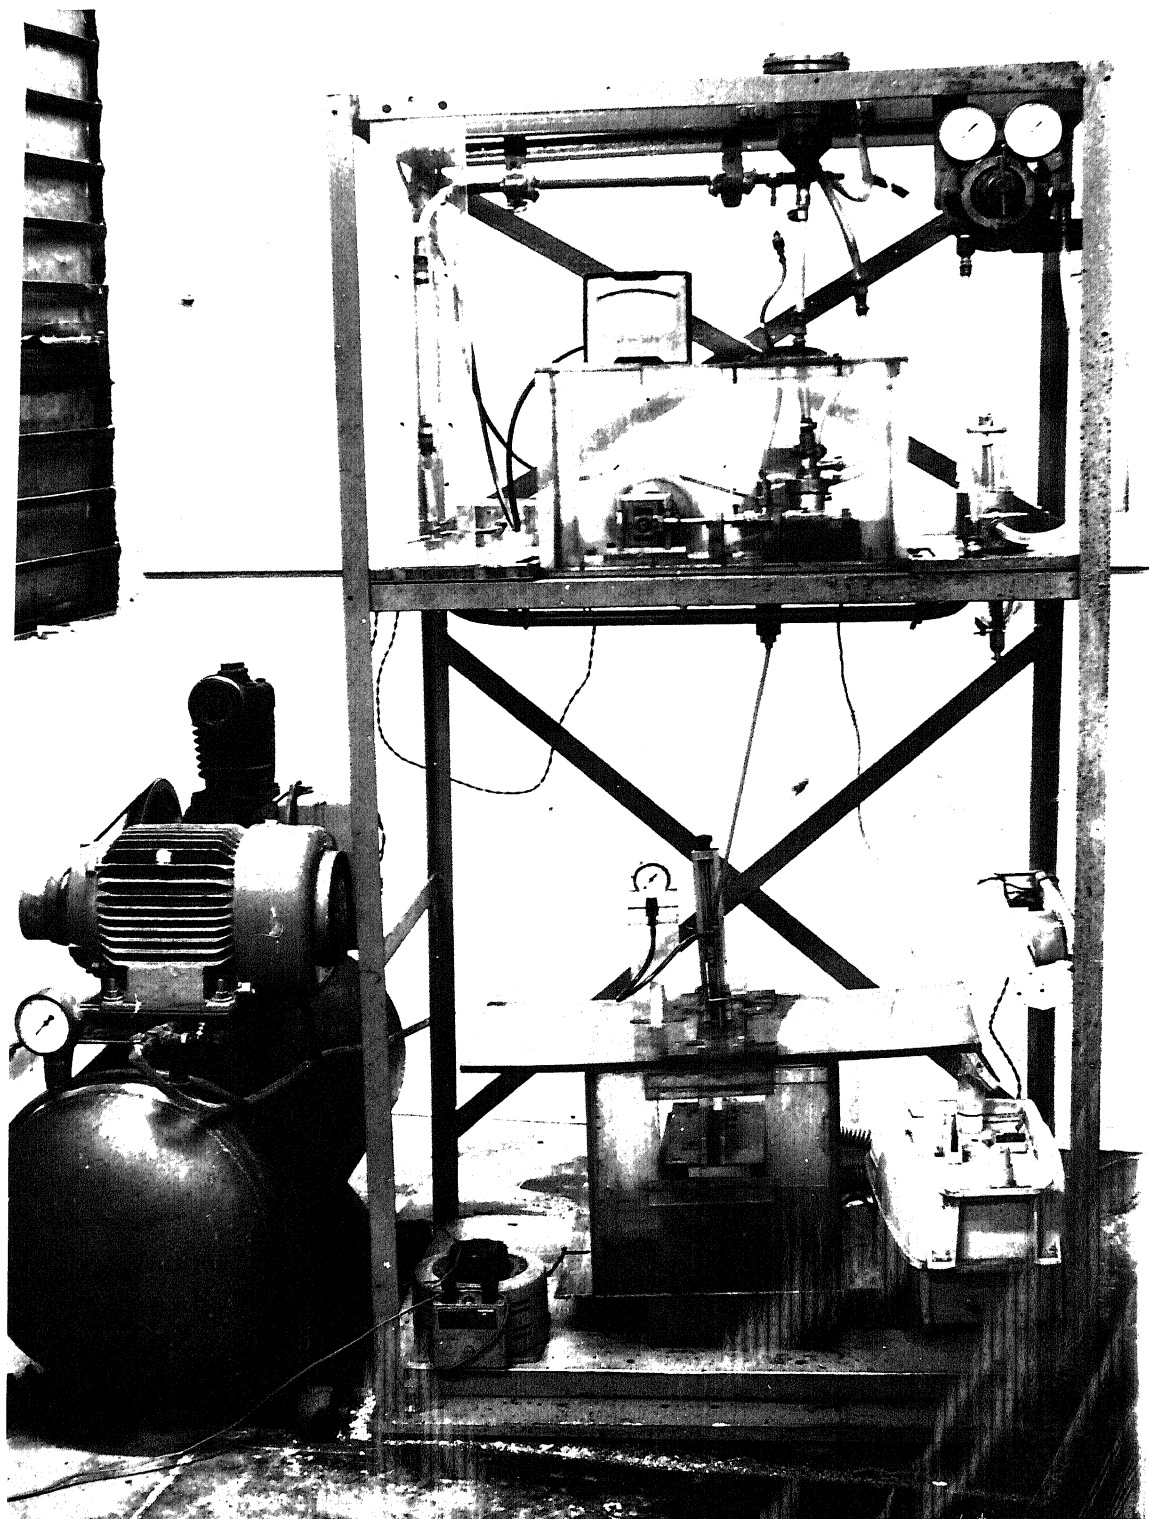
(a) Experimental set-up of abrasive jet machining.
